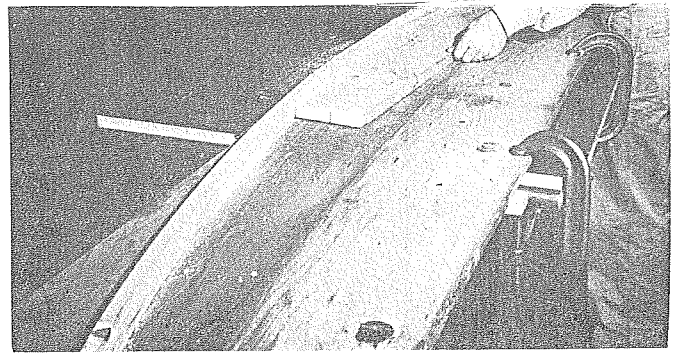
Using the jig to saw the curved pieces for sides of feeder trough.
